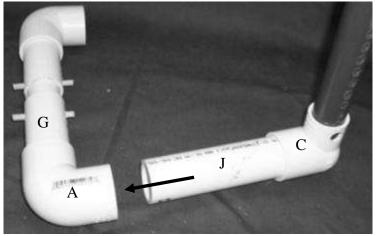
Assembly of the Medium/Large Wheelchair (Step 16).
